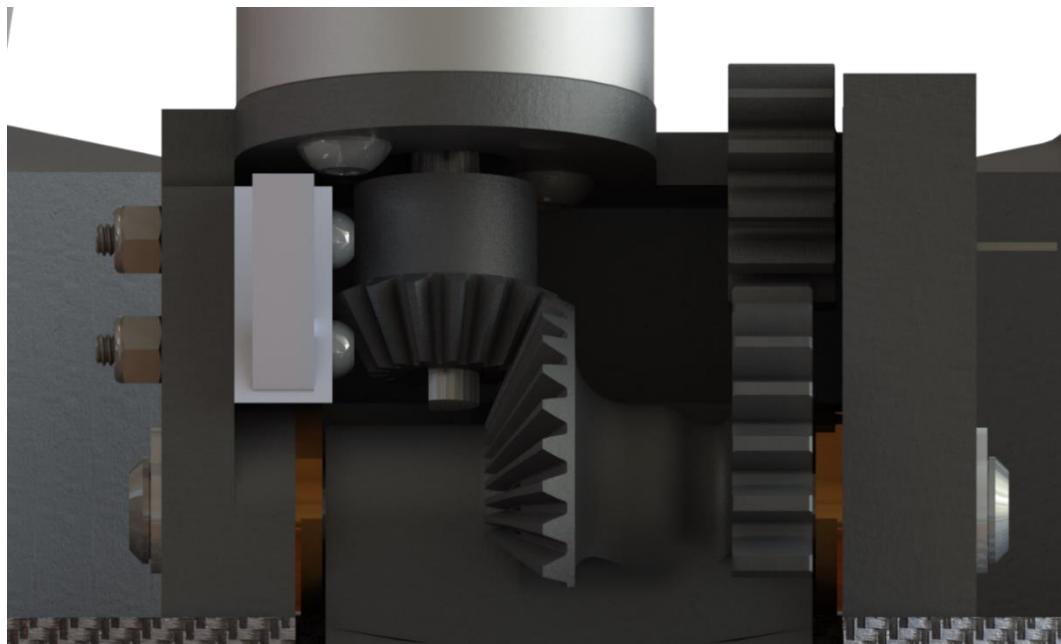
Front view of the motor mount housing the drive gears along with both sensors.
